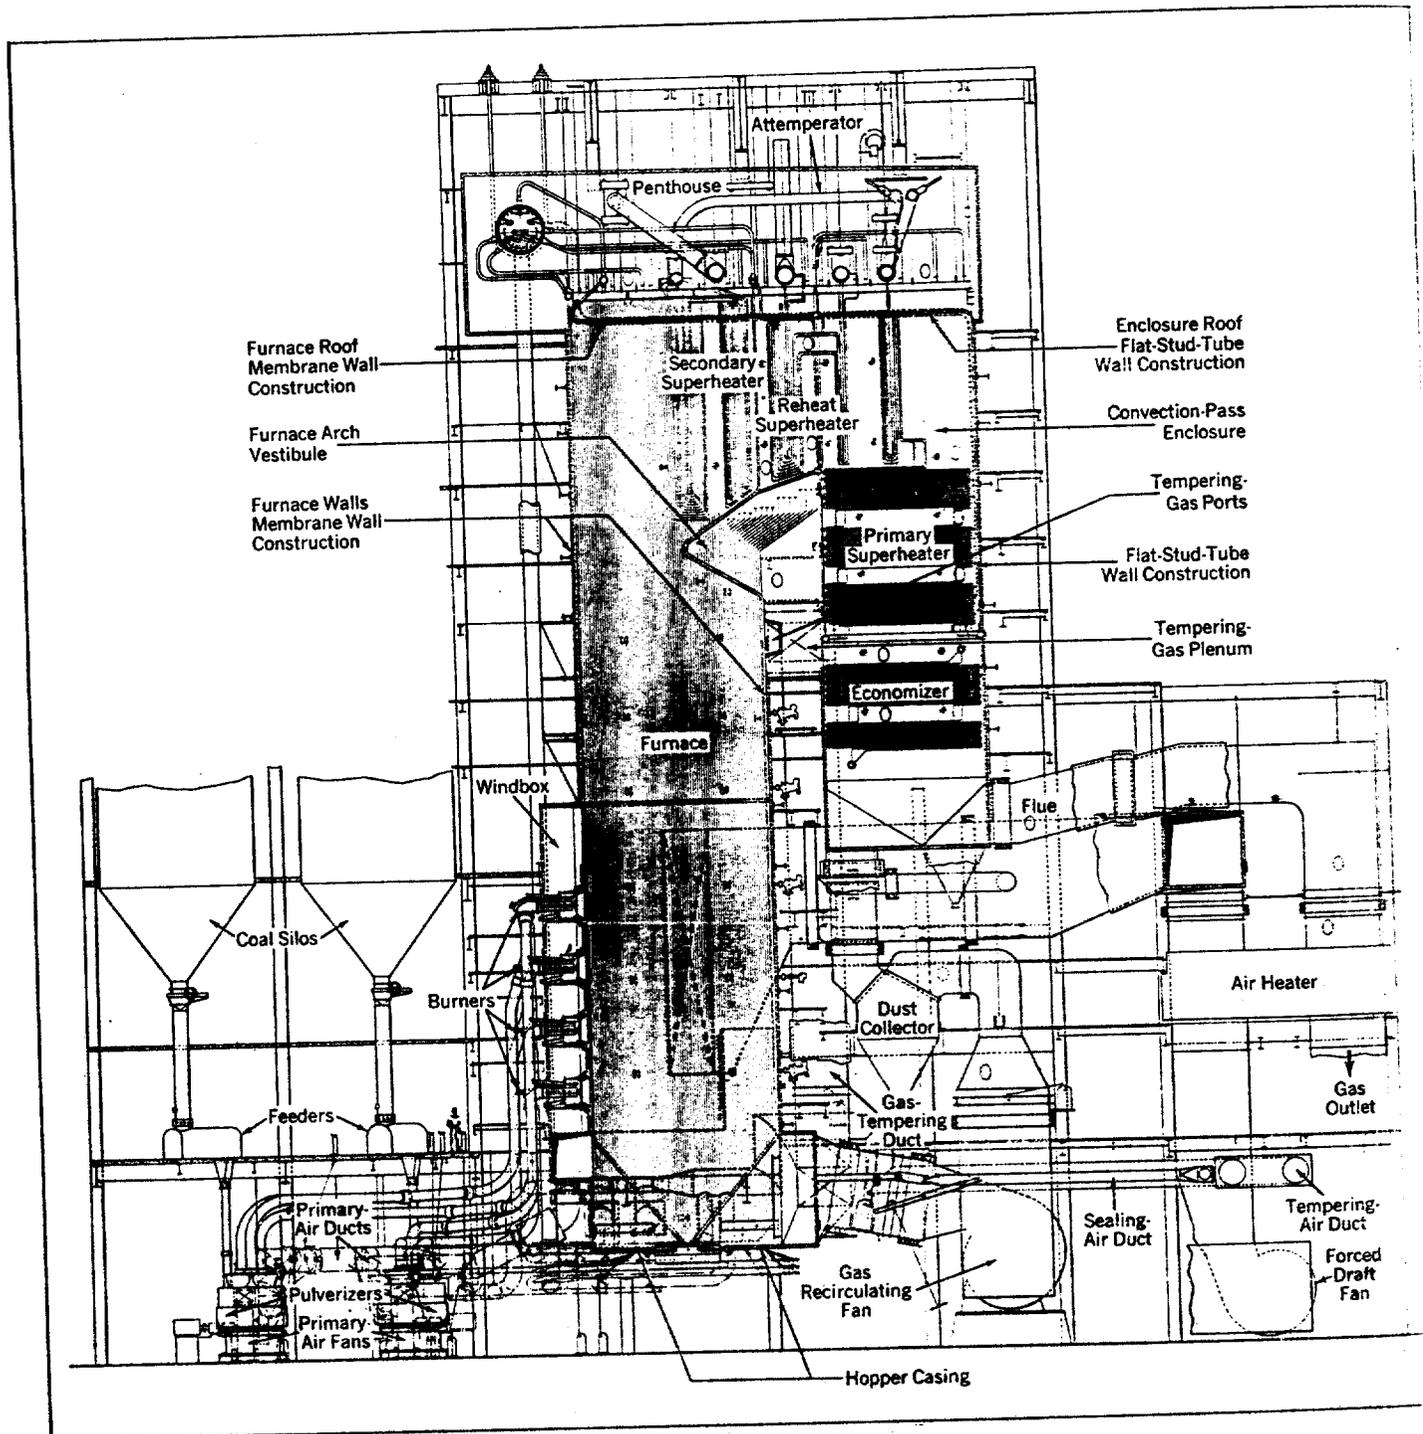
Enclosure constructions—pulverized-coal-fired Radiant boiler.
